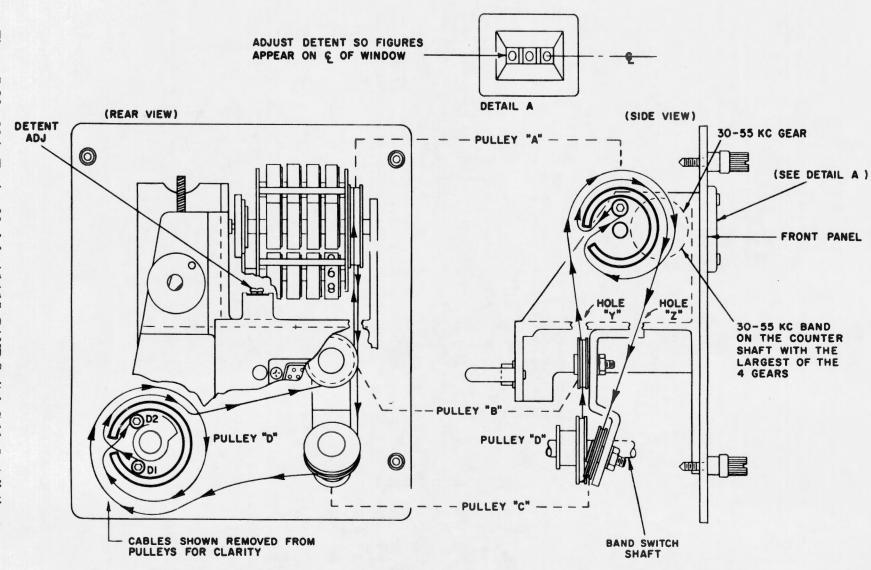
Secondary Tuning Module A1A16, Exploded View of Counter
